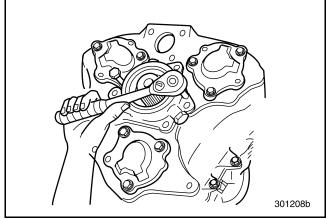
Removing Rear Mainshaft Bearing Cover Using Jackscrews
